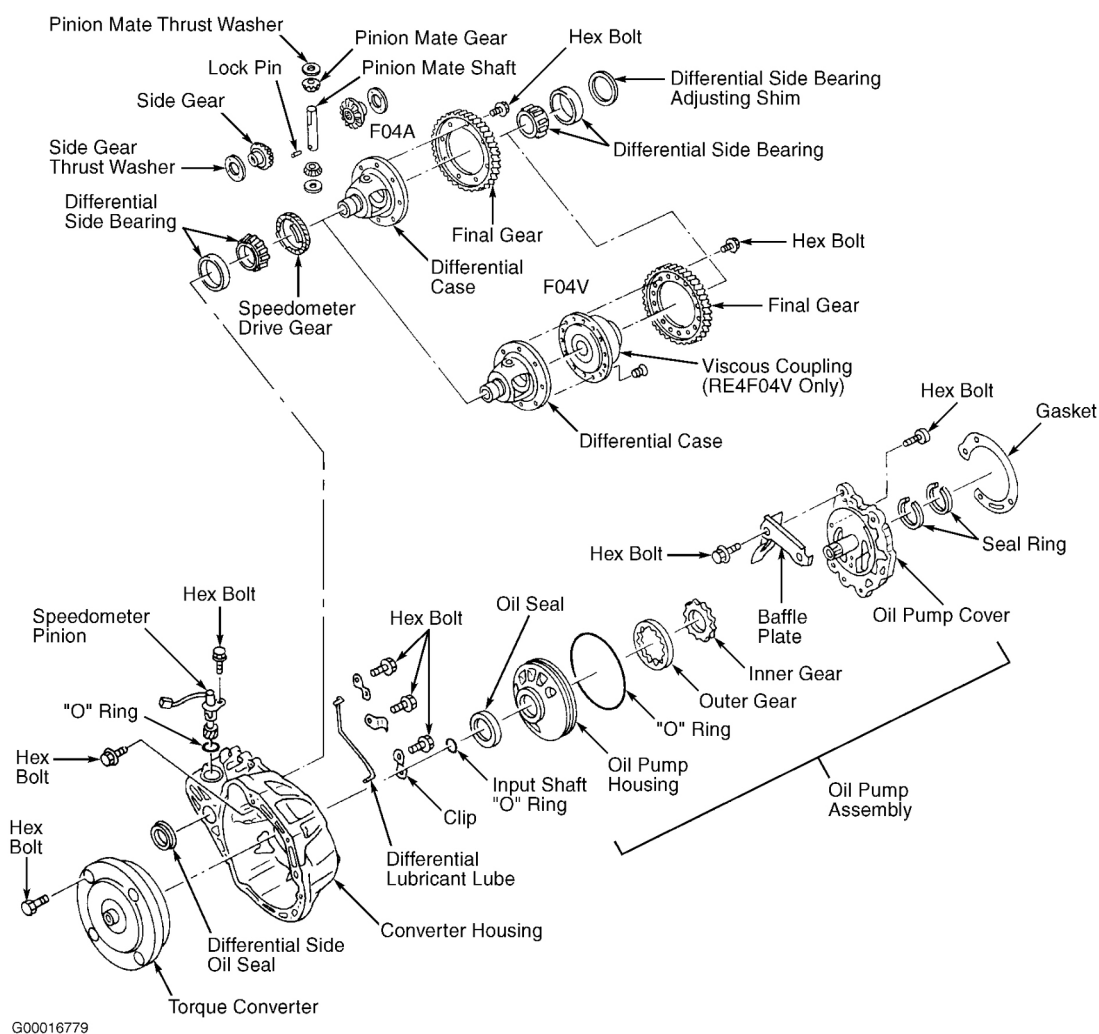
Exploded View Of Torque Converter Housing & Differential Components
